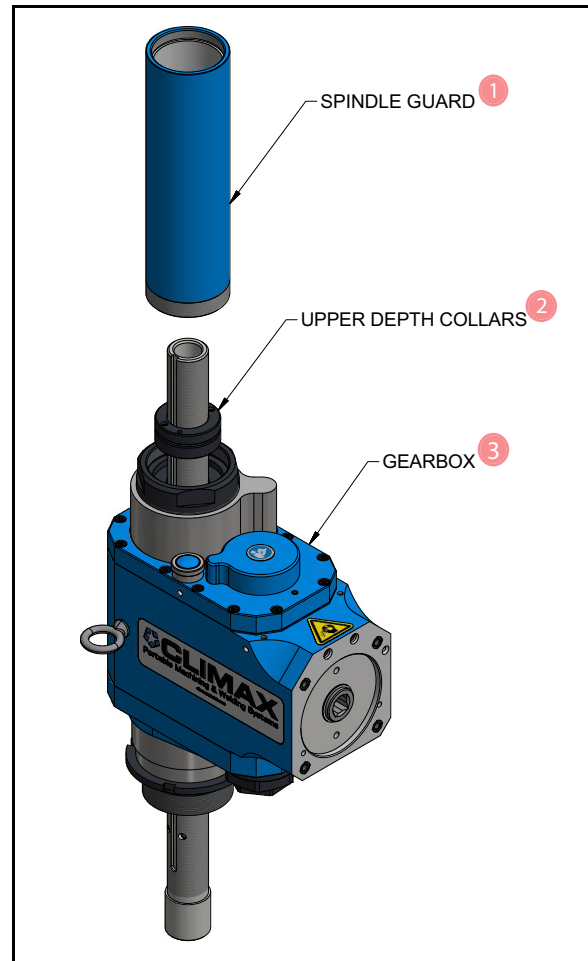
INSTALLING THE SPINDLE GUARD
